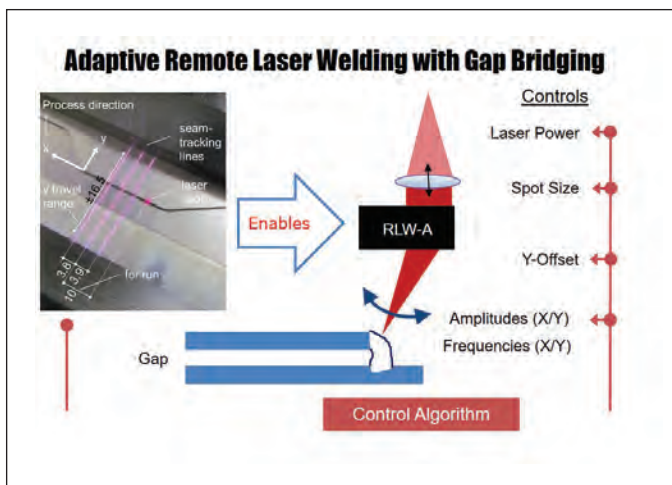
Adaptive remote laser welding with gap* bridging.
